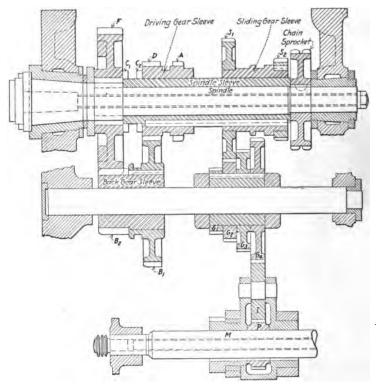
Diagram of driving gears Cincinnati milling machine.
